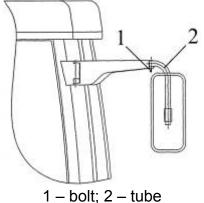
Mirror position adjustment in horizontal plane
